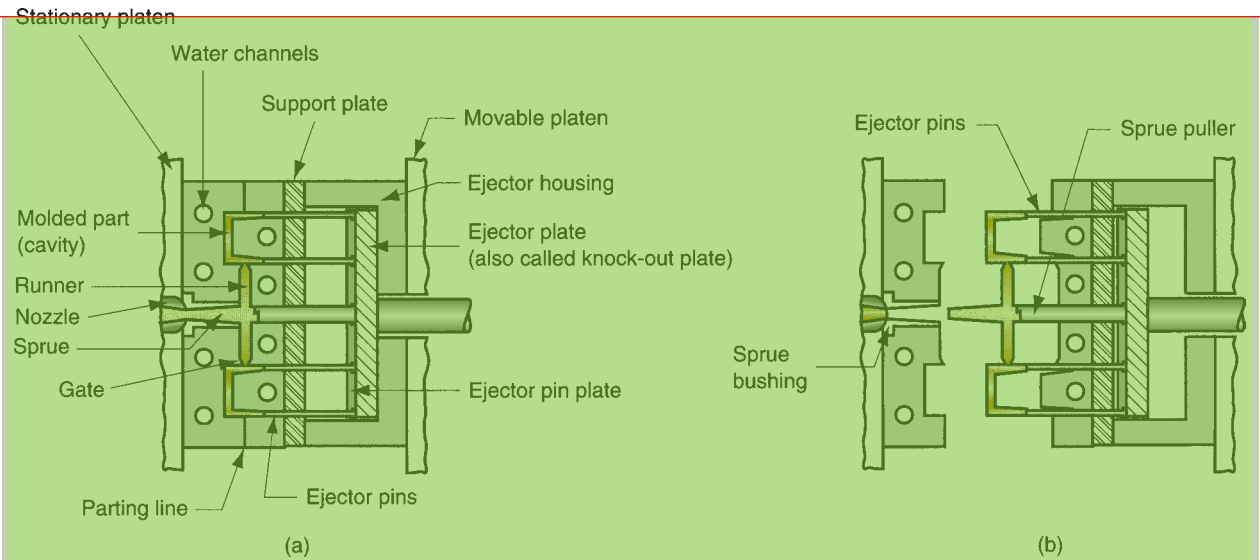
Details of a two-plate mold for thermoplastic injection molding: (a) closed and (b) open. Mold has two cavities to produce two cup-shaped parts (cross section shown) with each injection shot.
